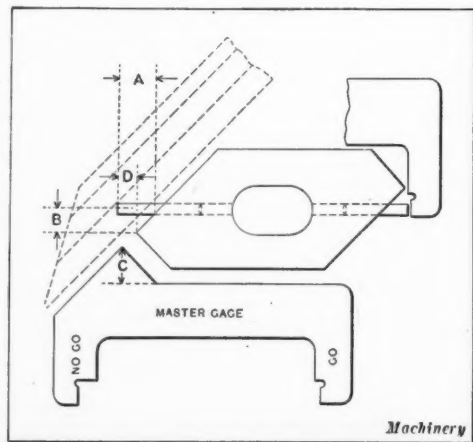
Gage for Depth of Counterbore of Angular Hole in Fuse Body
